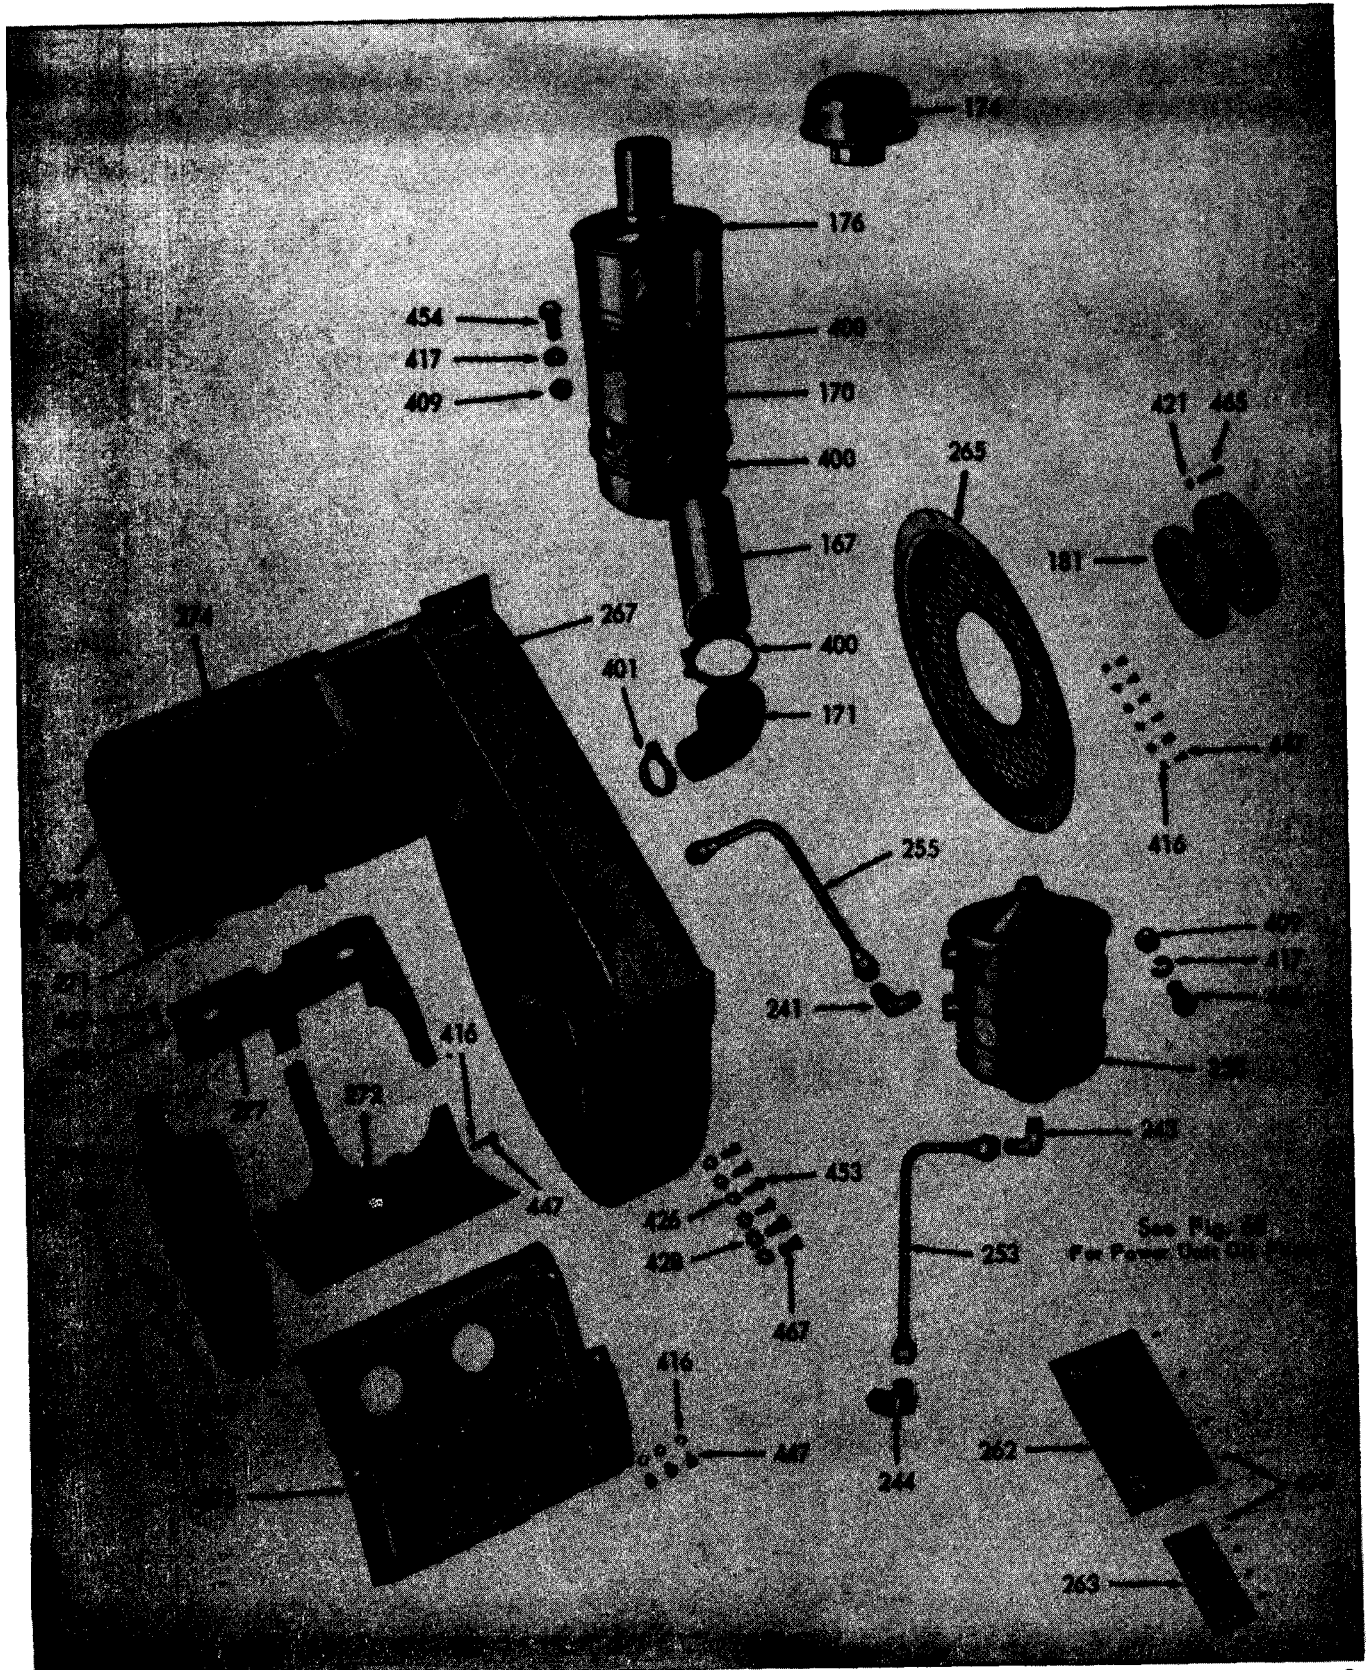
, MILITARY OIL FILTER, AIR SHROUDING AND AIR CLEANER
